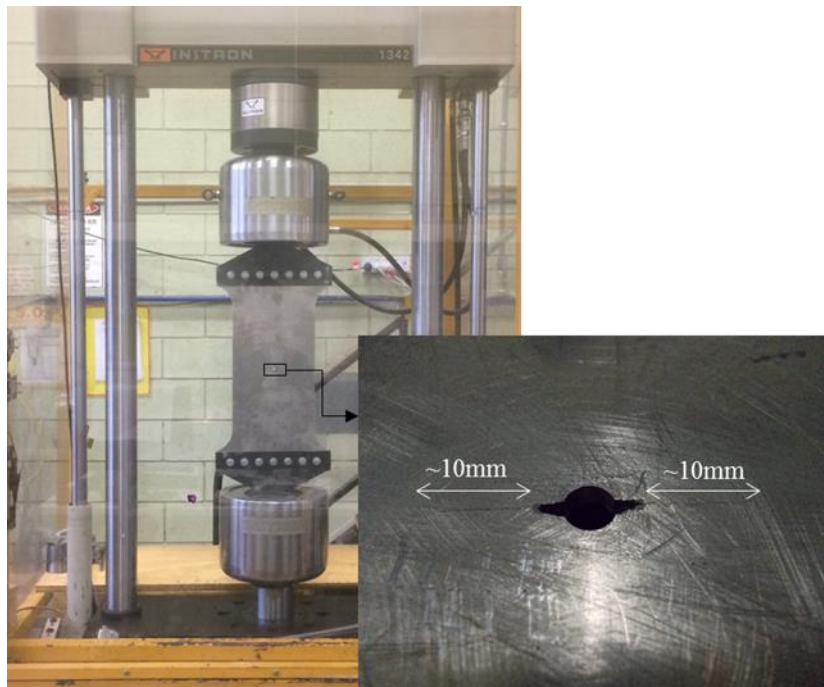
Fatigue testing using INSTRON and the fatigue crack generated at the end of the starter notches]
